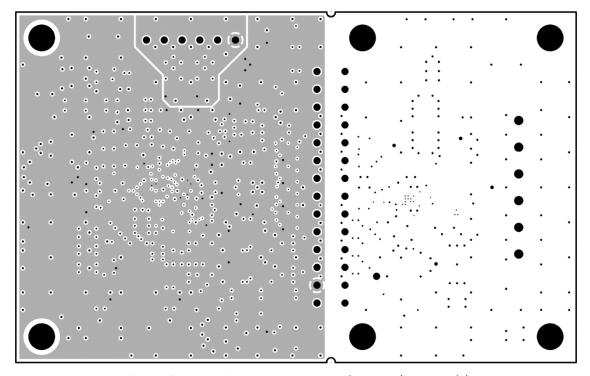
Layout view – Layer 4 - Internal - Power (not to scale)
